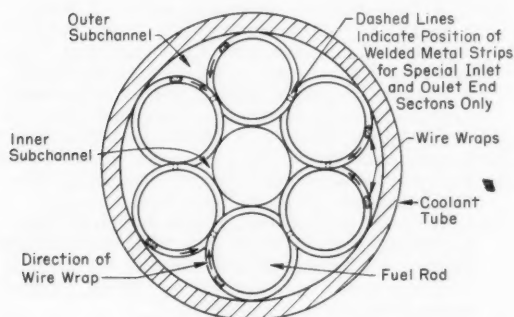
Cross section of a wire-wrapped seven-rod bundle in a coolant tube.<sup>18</sup>
